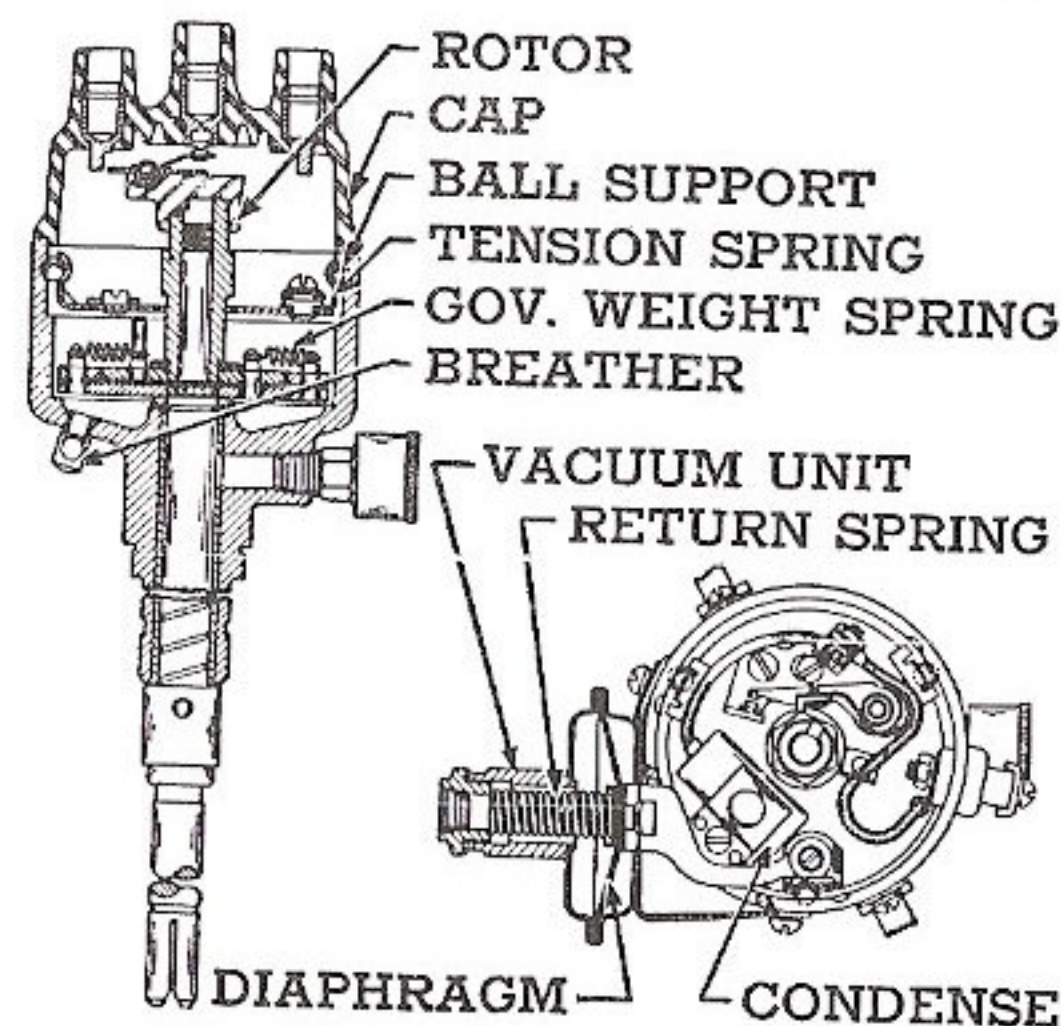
(Left)—Single Breaker Distributor Showing Vacuum Modifier Unit. Note the Breather Fitting
